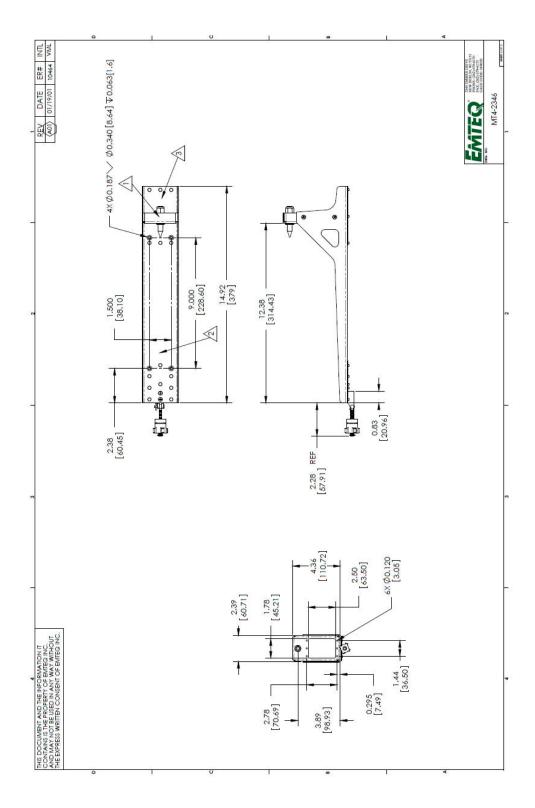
Outline drawing: SBU tray: EMTEQ MT4-2346-101 (page 2)
